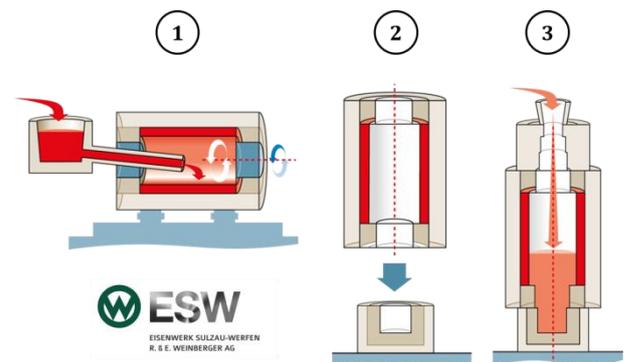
Production route of ESW's horizontal spincasting process for work rolls [11]. 1: Spincasting of the shell material, 2: Mounting of the molds, 3: Casting of the core material
